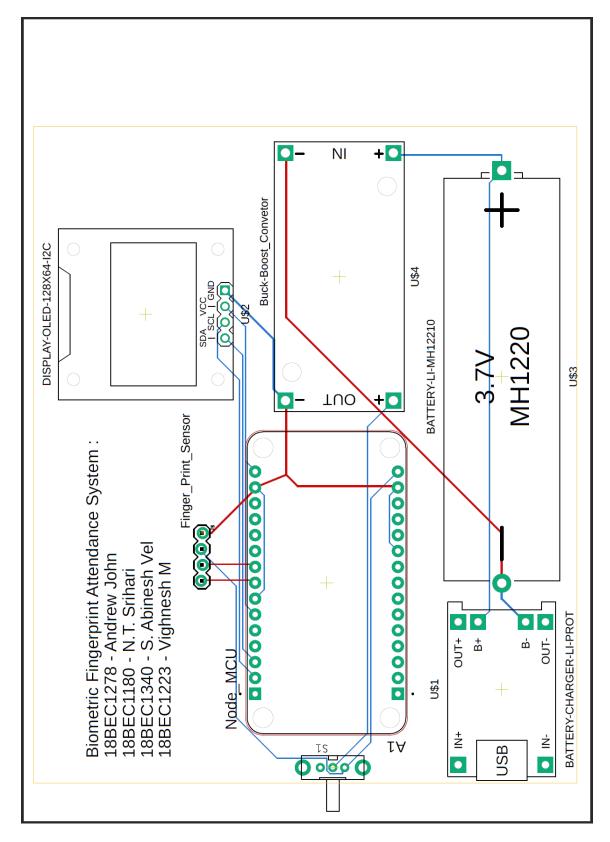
PCB Design of Biometric Fingerprint Attendance System
